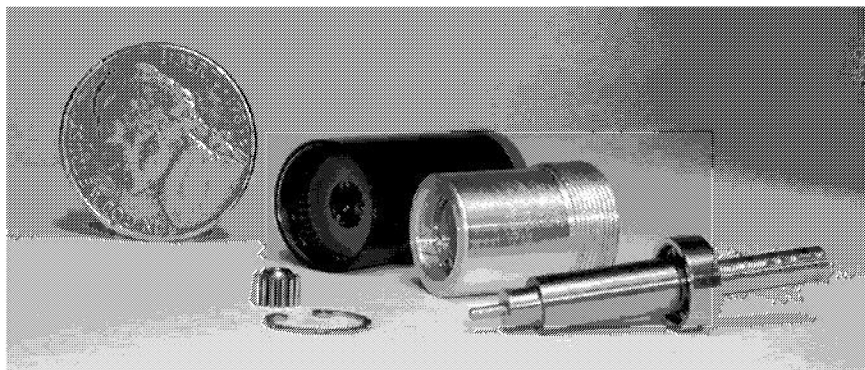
The use of a secondary 13mm Maxon 275:1 transmission necessitated custom miniature components including input shaft and housing. The 0.065” pinion and 0.015” thick retainer ring can be seen.
